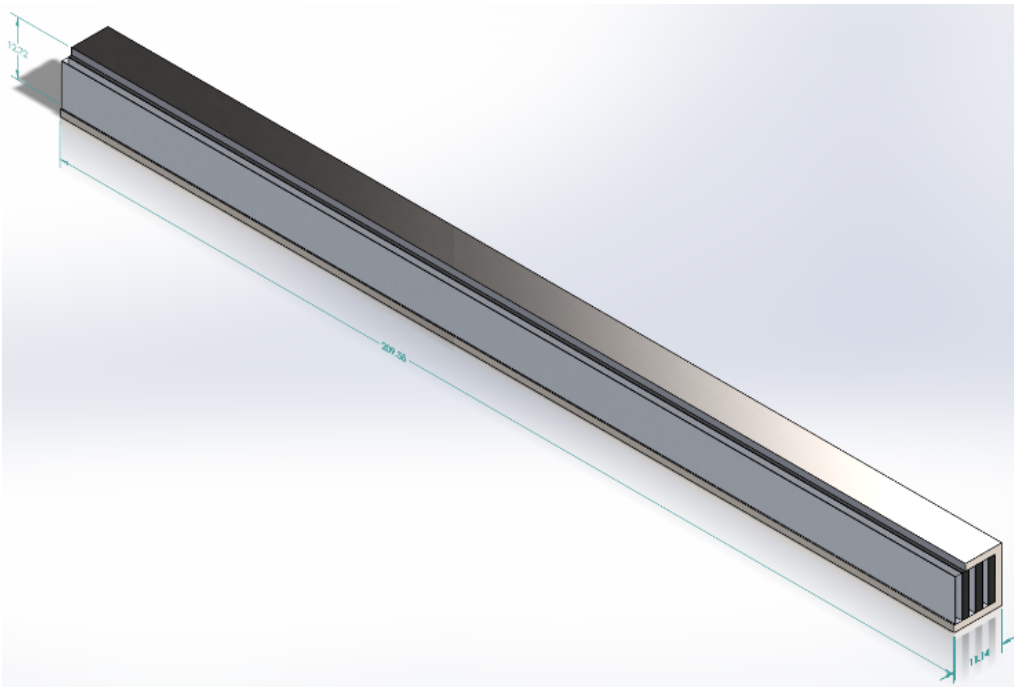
A trimetric view of the side damper. Dimensions are in mm.
